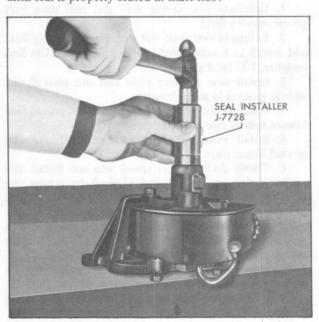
Installing Pump Shaft Seal (Off Car)
